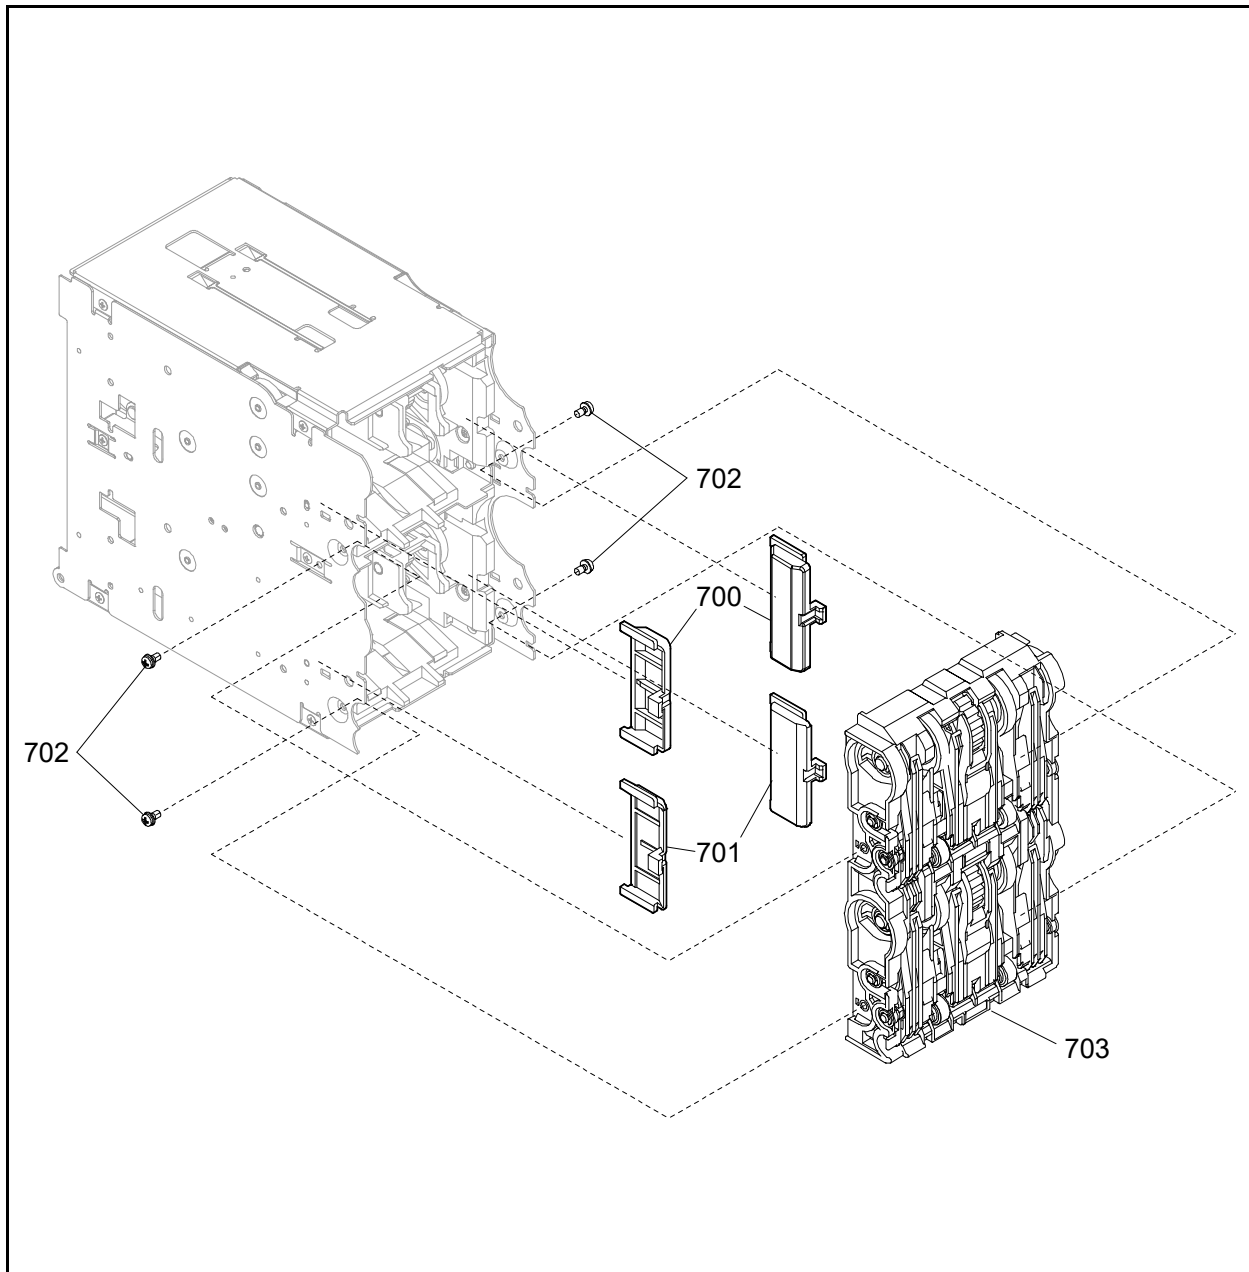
iPRO-RC Recycler Unit 2 Exploded View
